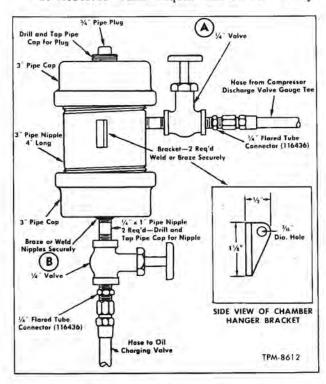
Fabricated Chamber for Adding Oil to Compressor
